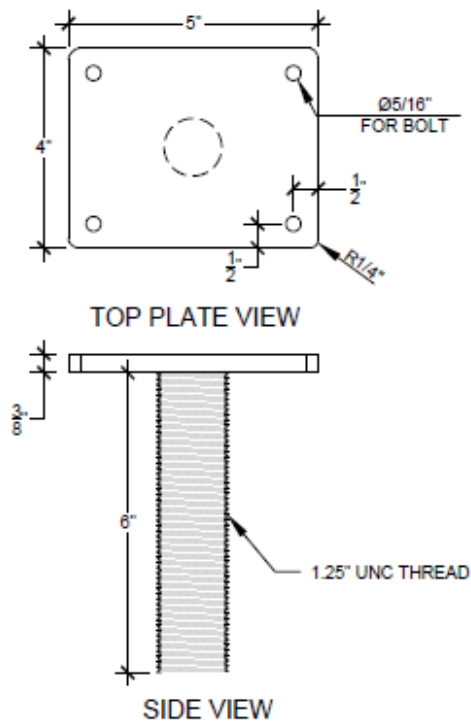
THREADED ROD AND TOP PLATE ASSEMBLY
